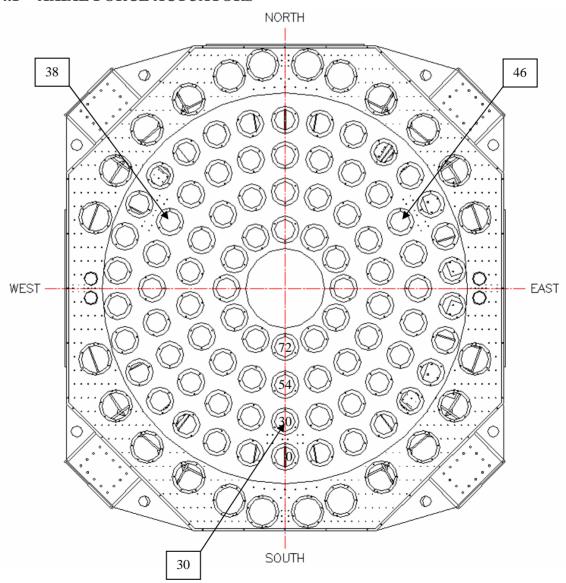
Axial Force Actuators and Axial Fixed Points: arrangement, top view
